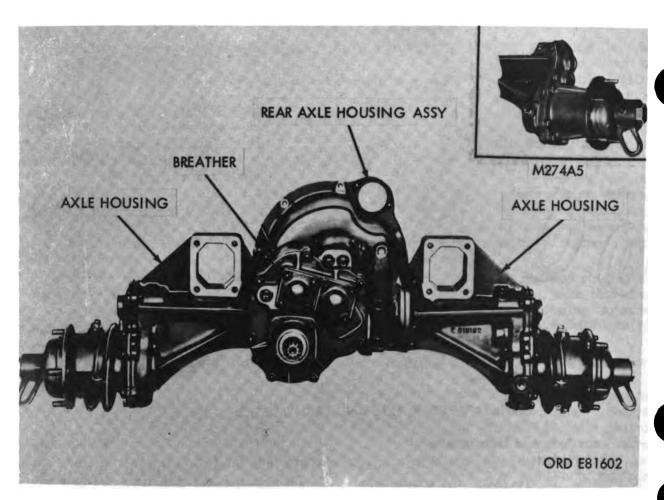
Rear axle and transmission assembly (MS74AS, M274AS and M274A4).
